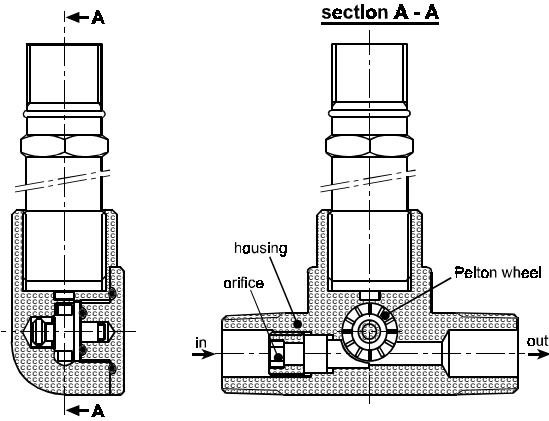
Pelton Wheel FM: ITT Barton 7506
